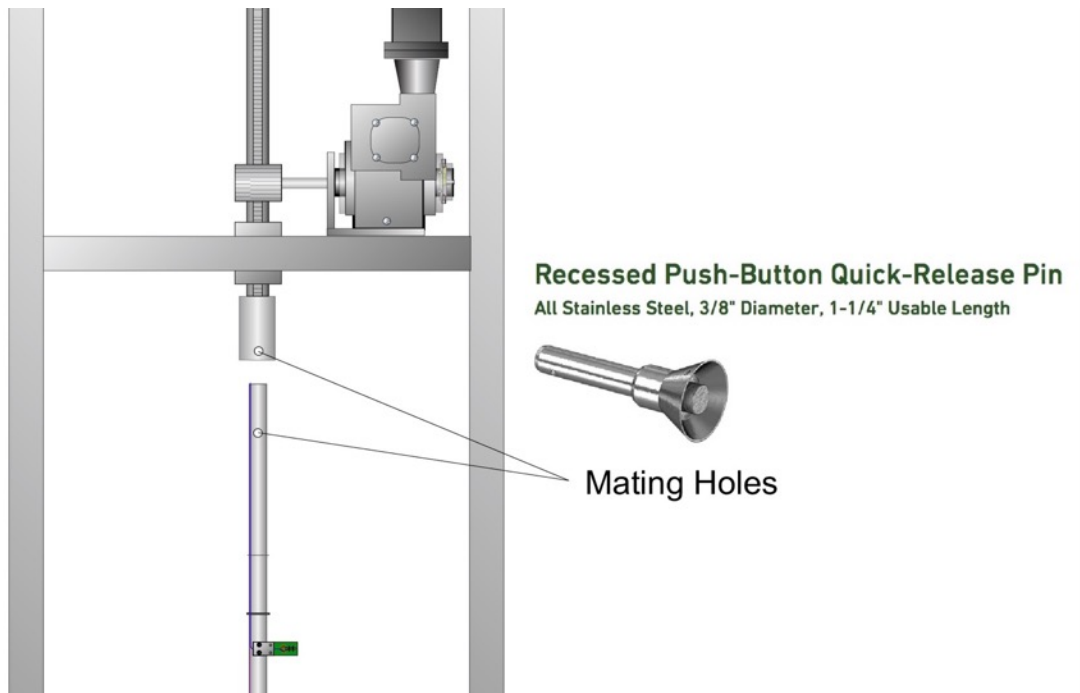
Details of connecting the rod assembly to the rack and pinion gear with a special recessed push-button quick-release pin is shown.
